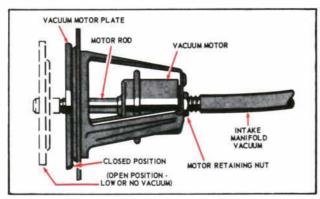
Vacuum Override Motor Assembly Attached to Air Cleaner
